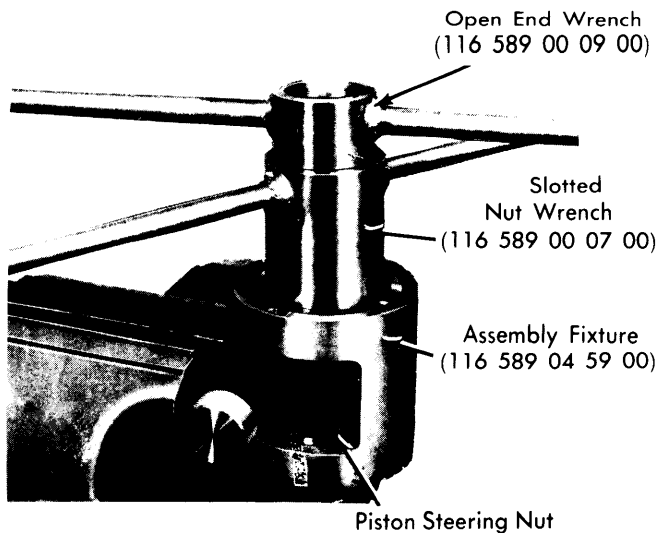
Removing Worm Gear Nut from Piston/Steering Nut
